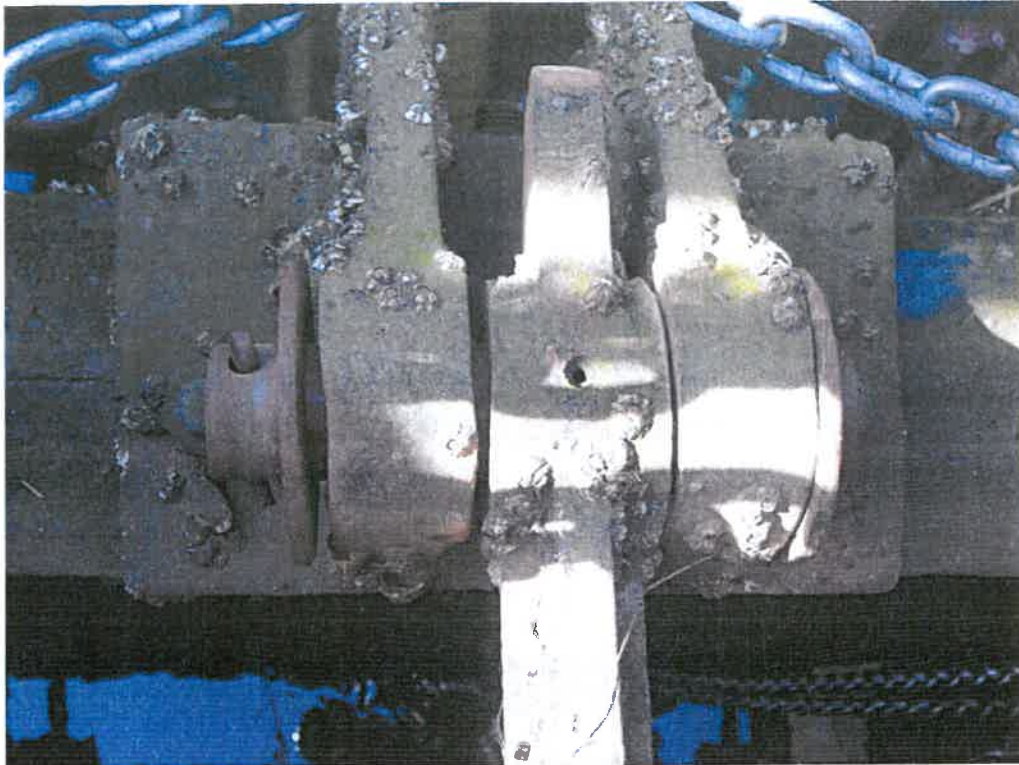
Typical Worn Hinge Assembly with Missing Bushings
